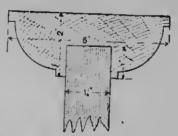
Section of Top Frame and Side-piece of Portable Desk,
